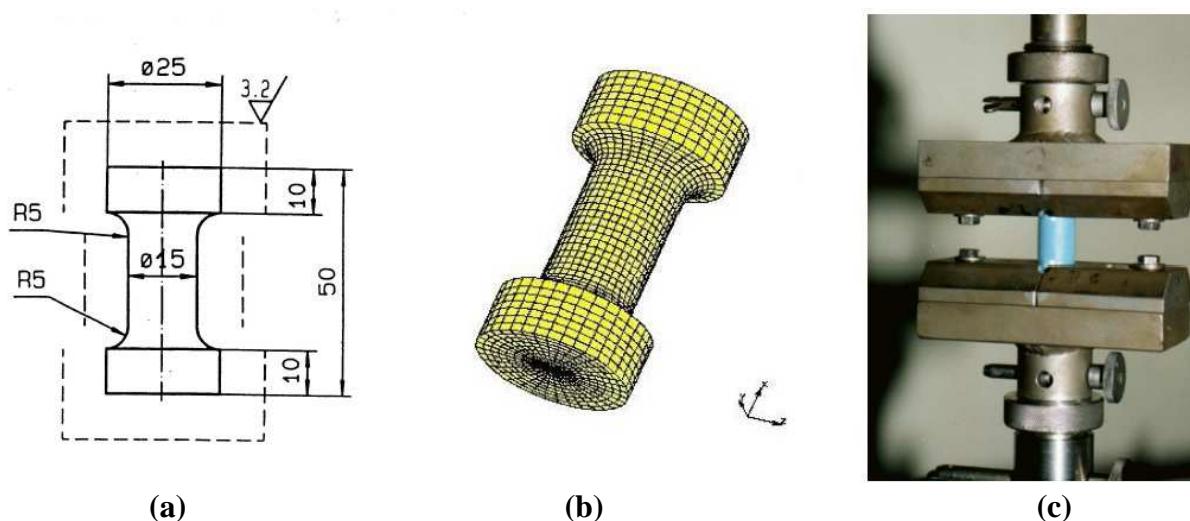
Dimensions of a dumbbell specimen (a), a 3D computer model (b) and a specimen in situ during fatigue testing (c)
